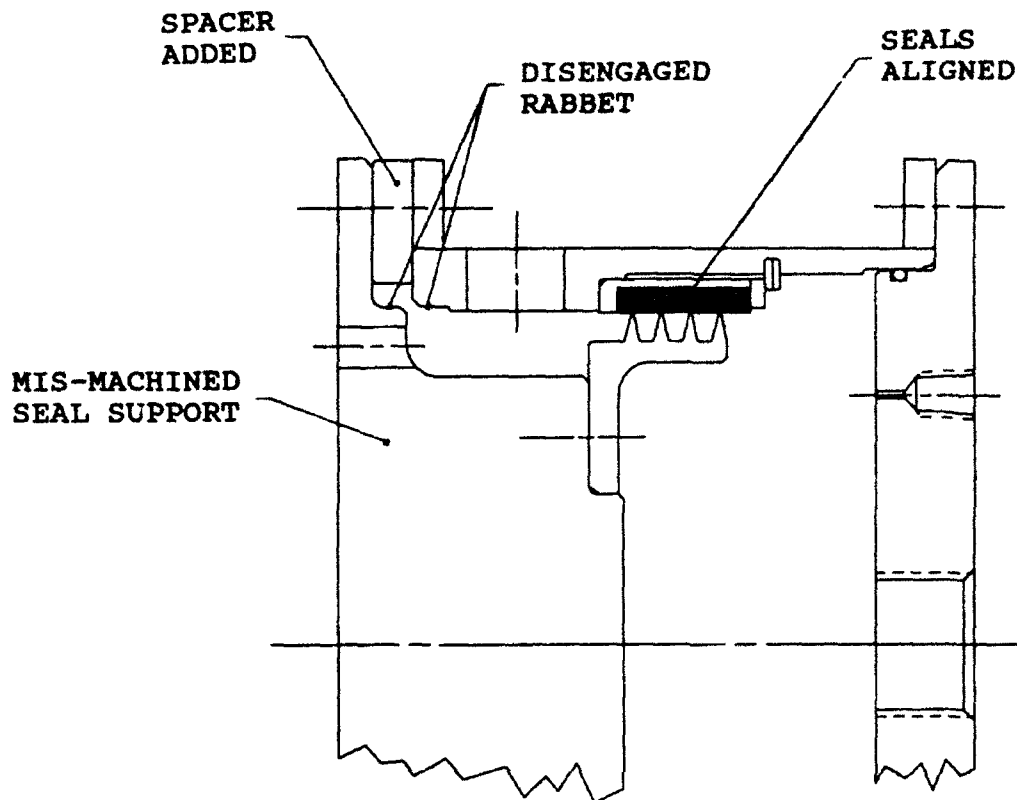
STATIC TEST HEAD AS ASSEMBLED WITH SPACER
